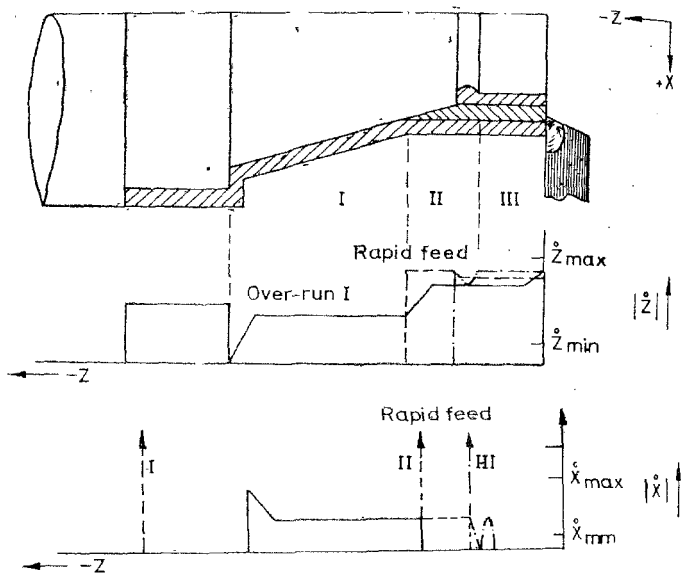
Distribution of cuts on workpieces with varying machining allowance.
